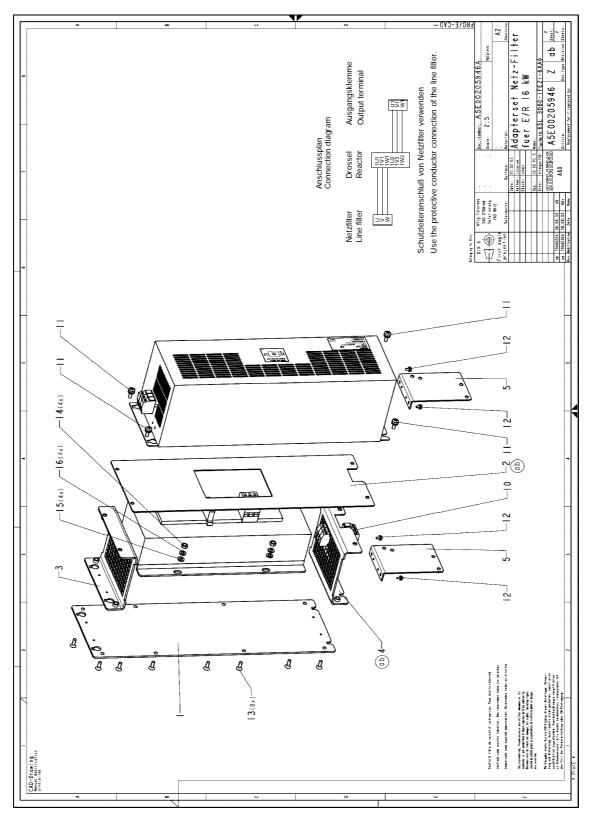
Adapter set, line filter for I/R module 16 kW, 6SL3060-1FE21-6AAx; mounting
